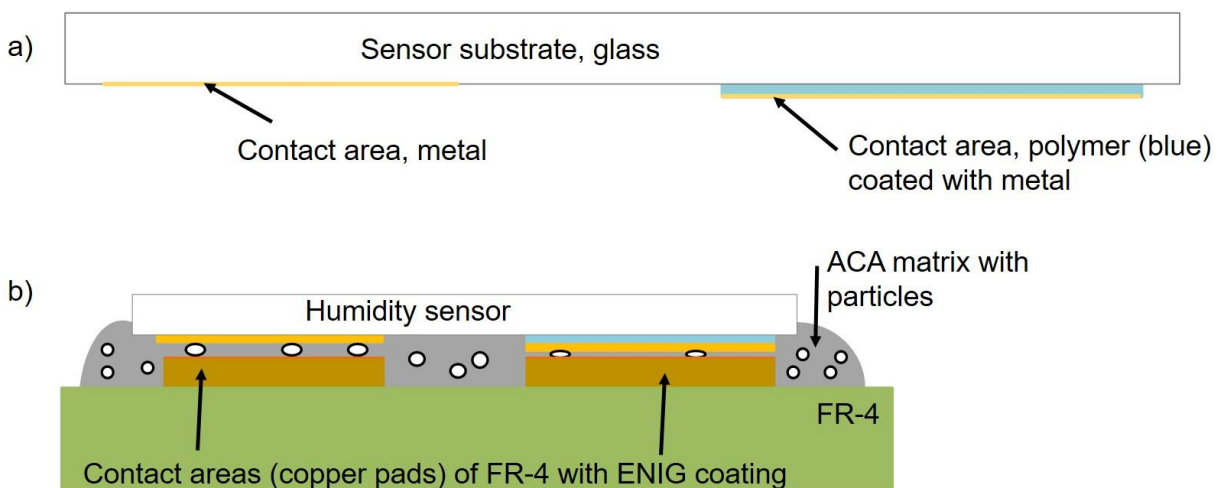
Schematic drawing of a) humidity sensor chip b) humidity sensor attachment on FR-4.
